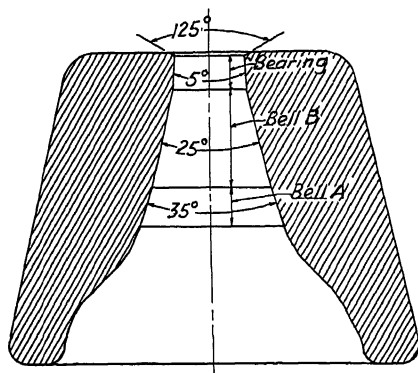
DIE SIMILAR TO FIG. 12, BUT WITH 5° BEARING, WHICH PRODUCED SOUND WIRE.
